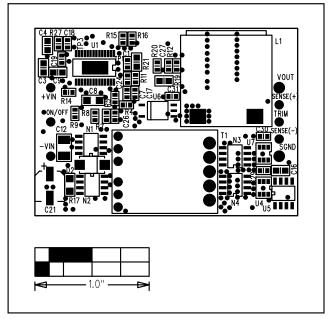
MAX5051 EV Kit Component Placement Guide—Component Side
